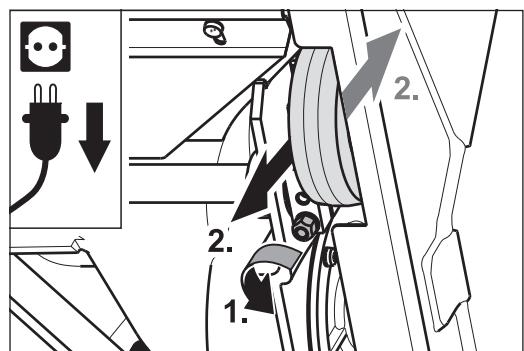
Release the screw on the right-hand wheel clamp (1.) and adjust the wheel (2.).
